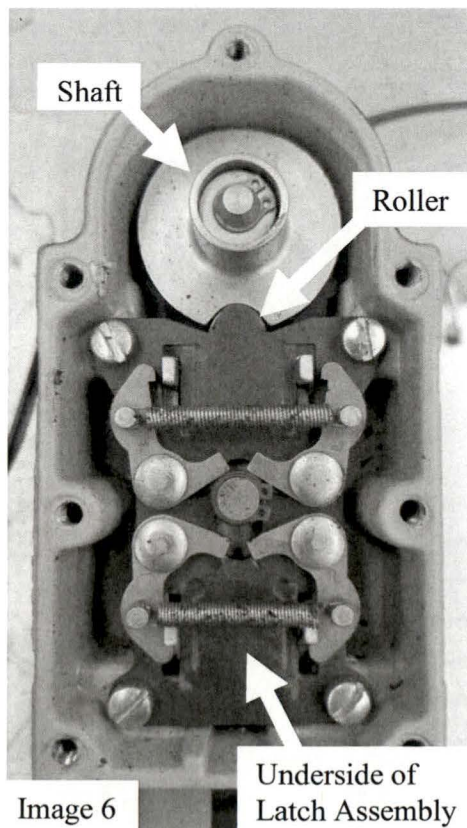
Dried lubrication at multiple moving components contributed to the limit switch failure. The dried lubricant at the O-ring would increase the amount of torque required to rotate the shaft. If lubrication was present, the shaft would rotate and the roller on the latch assembly would properly operate to actuate the contacts. When torque on the shaft is released, a spring in the latch assembly pushes the contacts back to shelf state (opening the contacts).
